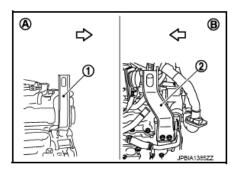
Identifying Engine Front And Rear Slingers Courtesy of NISSAN MOTOR CO., U.S.A.
